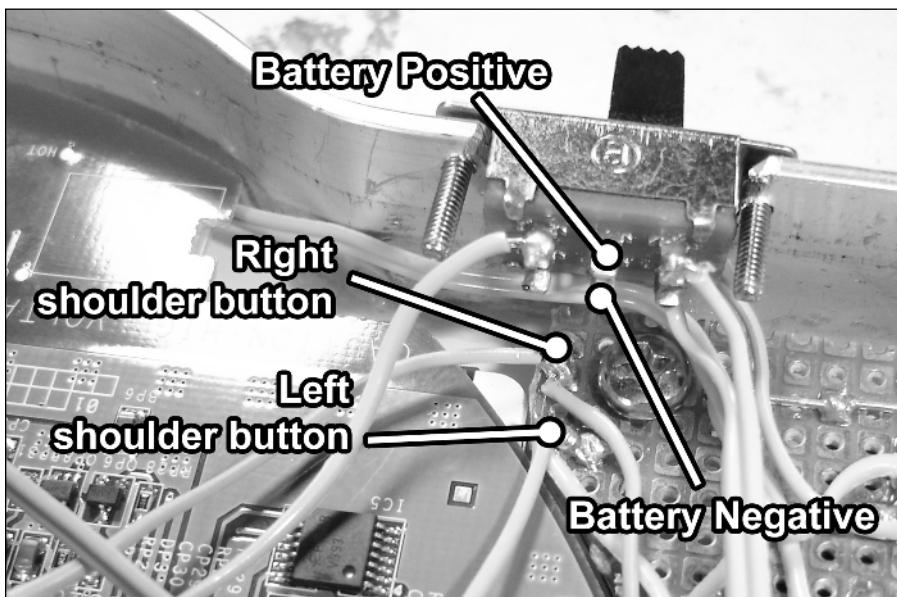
Connecting the right and left shoulder buttons to the PC board.
